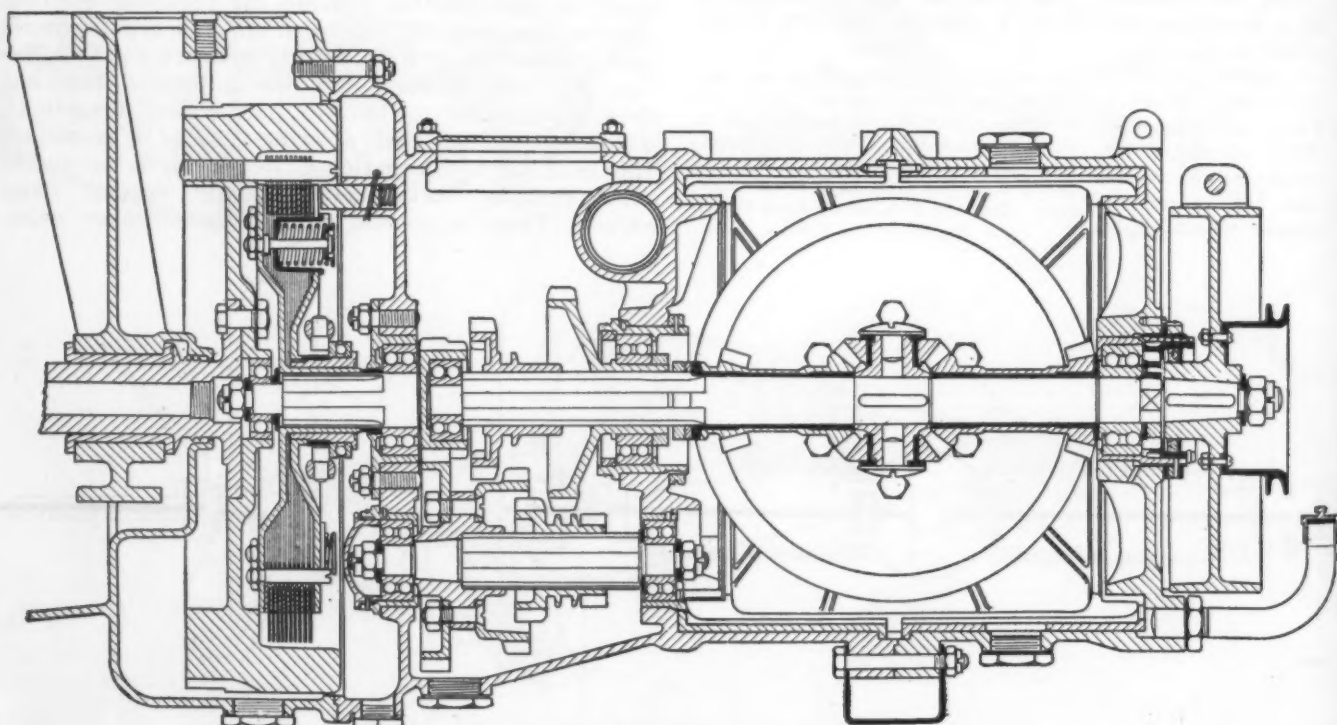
RUMPLER CLUTCH, GEARSET, FINAL DRIVE AND BRAKE-DRUM
